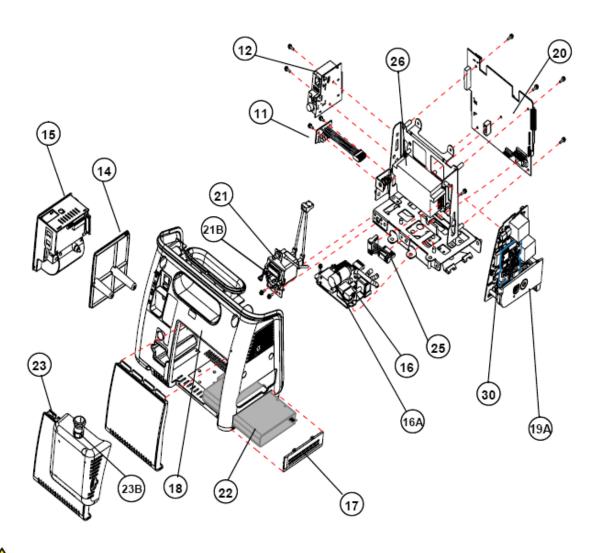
Rear Case Assembly: PCB boards are items 11, 12, 19A, 20, 30
